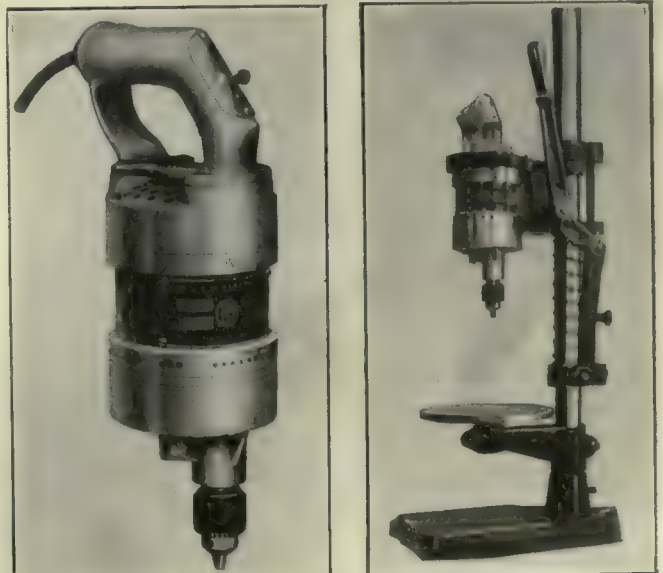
C.L.P. $\frac{1}{4}$ -IN. PORTABLE ELECTRIC DRILL AND STAND
